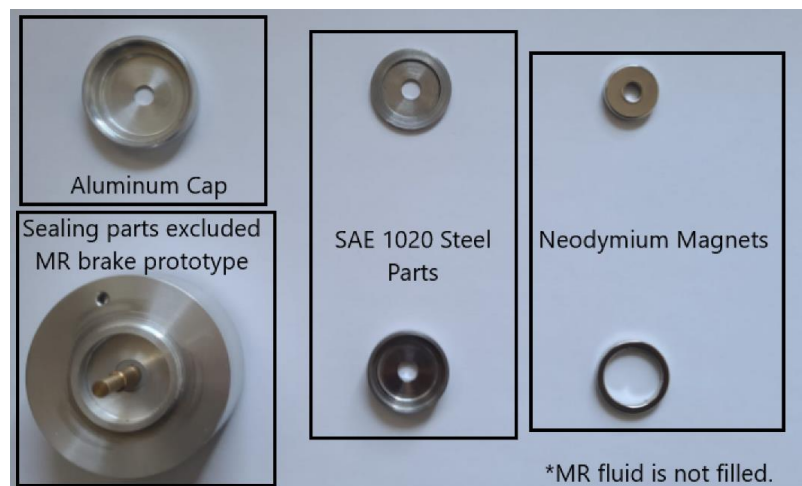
MR Brake prototype without MR fluid and parts related with sealing.
